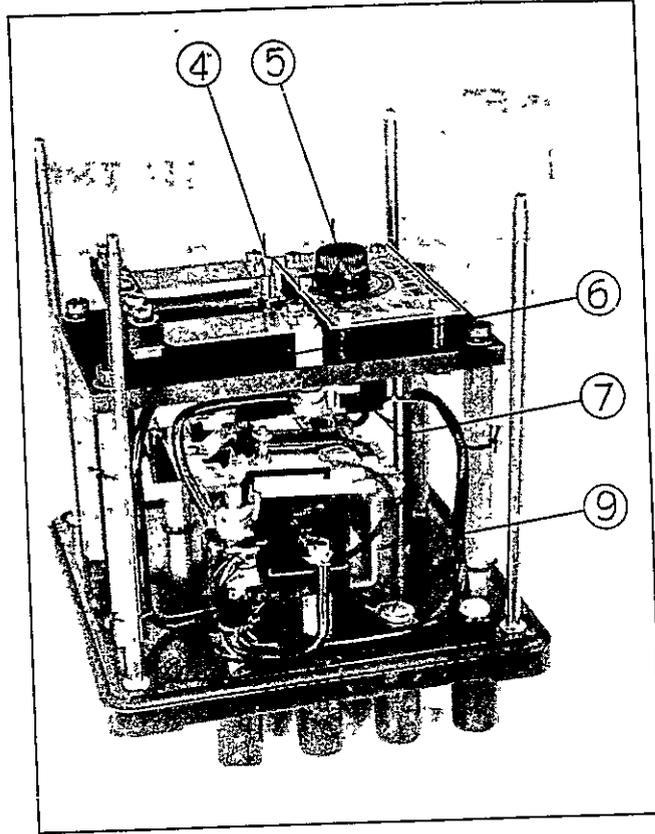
Side View of the Type TH Single-Element Thermal Timing Relay. 4—"F" Bimetal Screw, 5—"T" Timing Screw, 6—Bimetal Assembly, 7—Micro Switch, 9—Auxiliary Contactor.
